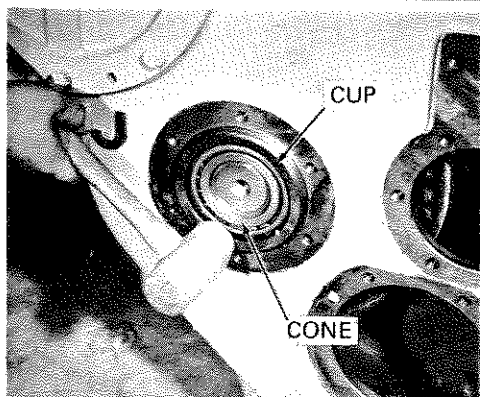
Installation Of Drum And Drum Shaft (Sheet 3 of 3)
